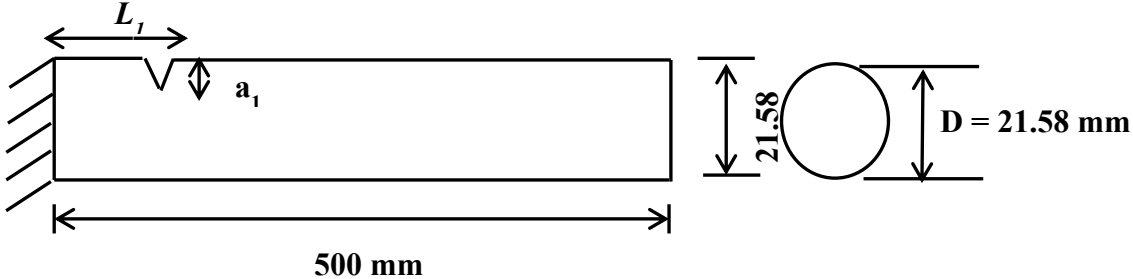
Sketch of uniform cantilever beam with single crack of circular cross-section
